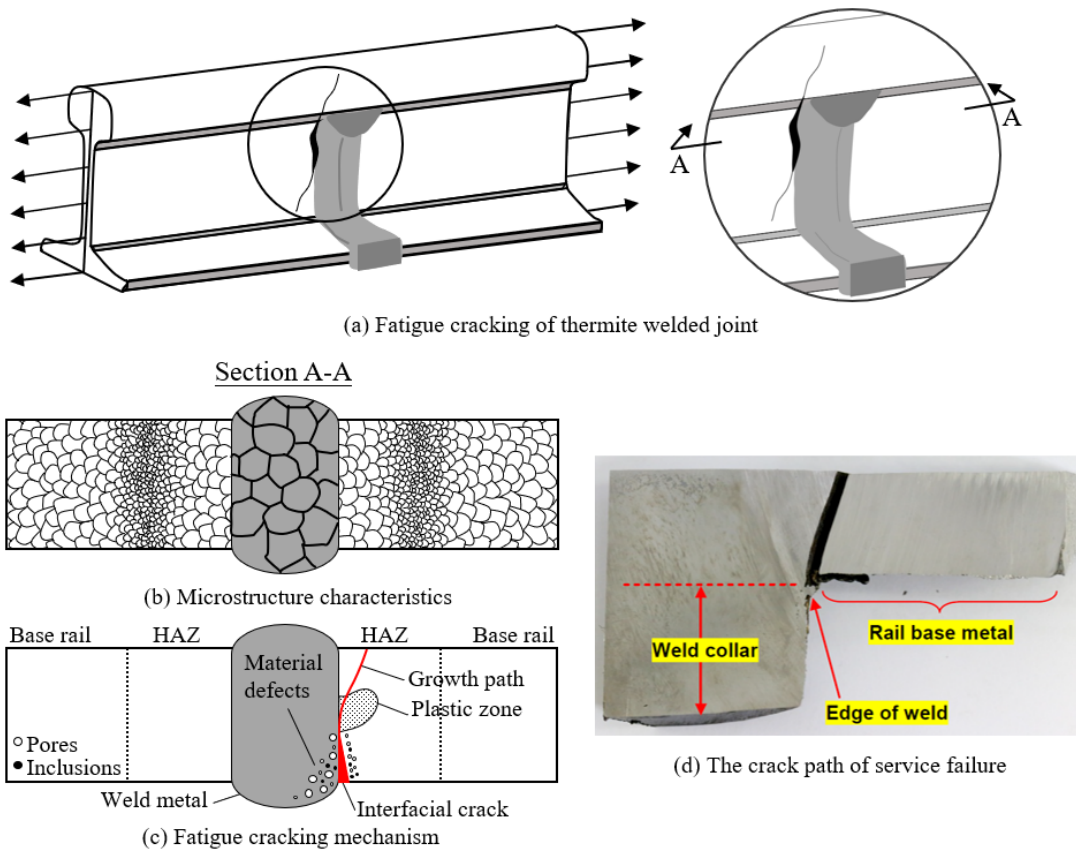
Fatigue cracking mechanism of thermite welded joint
